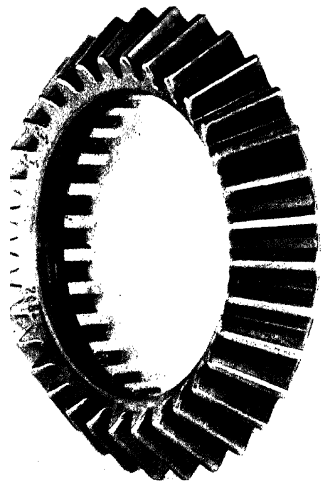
Bramo Fafnir 323P stationary or fixed gear.
